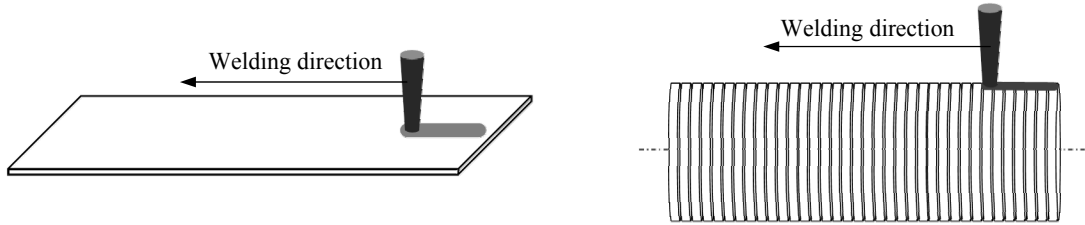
Left side: schematic representation of the single sheet welding experiment; right side: schematic representation of the stacked configuration
